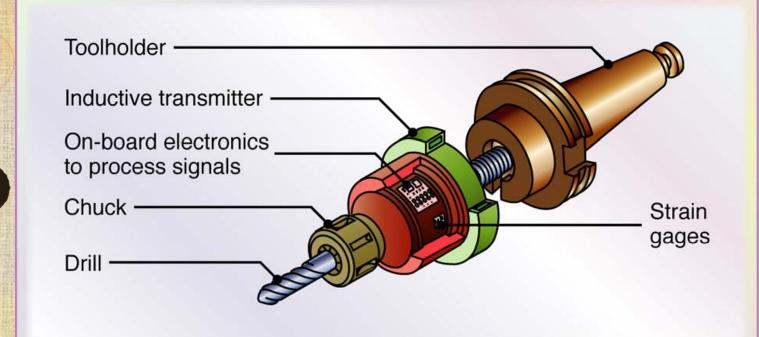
A toolholder equipped with thrust-force and torque sensors (smart toolholder), capable of continuously monitoring the cutting operation. Such toolholders are necessary for the adaptive control of manufacturing operations. *Source*: Courtesy of Cincinnati Milacron, Mc.
